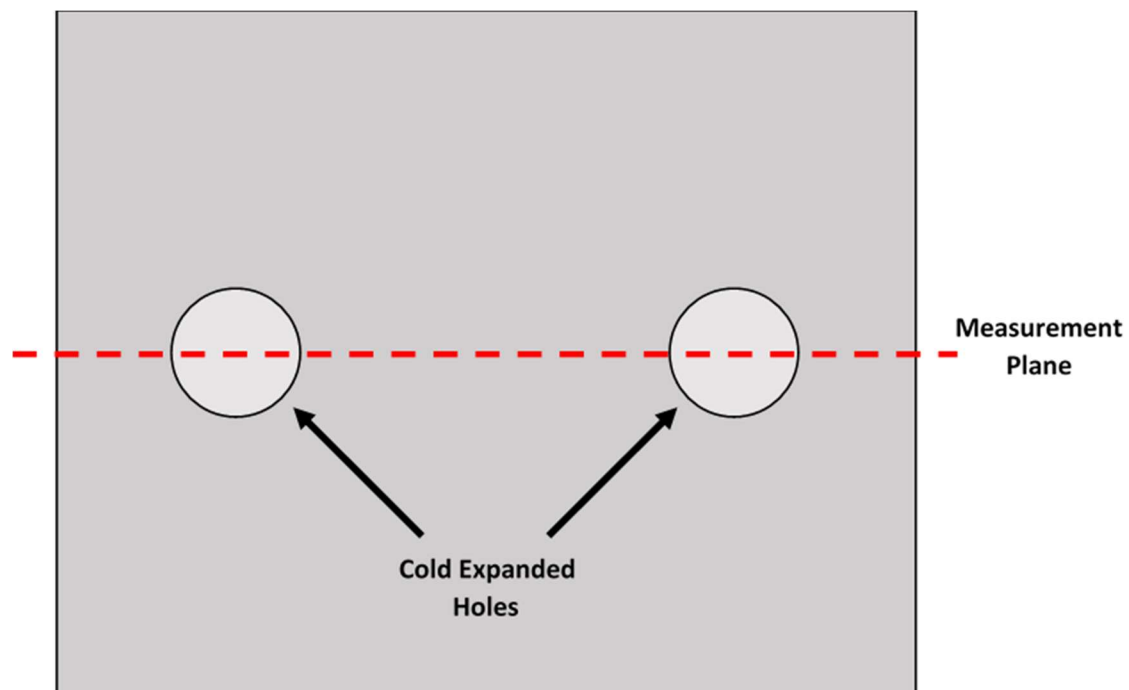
Specimen configuration for performing residual stress measurements with the contour method. The specimen is cut along the measurement plane using electrical discharge machining.
